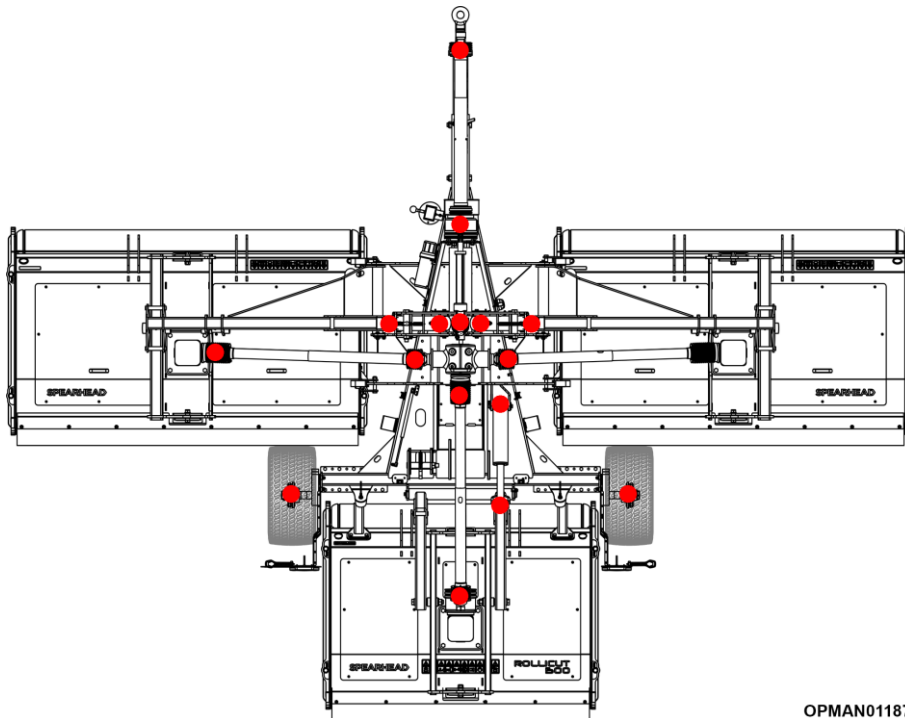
Rollicut Wing Driveshaft Grease Locations
